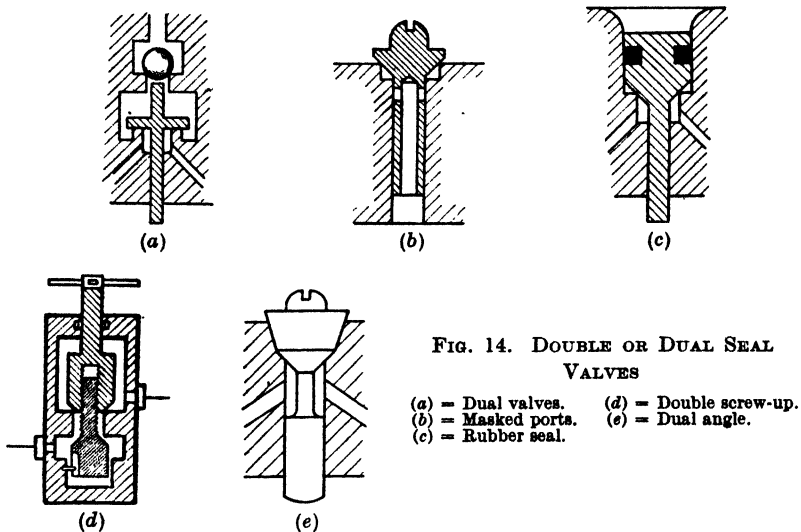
DOUBLE OR DUAL SEAL VALVES
